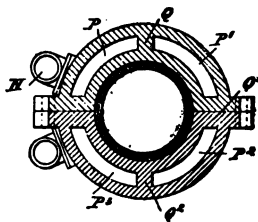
View showing Horizontal Section on line 1-2, Fig. 43.
